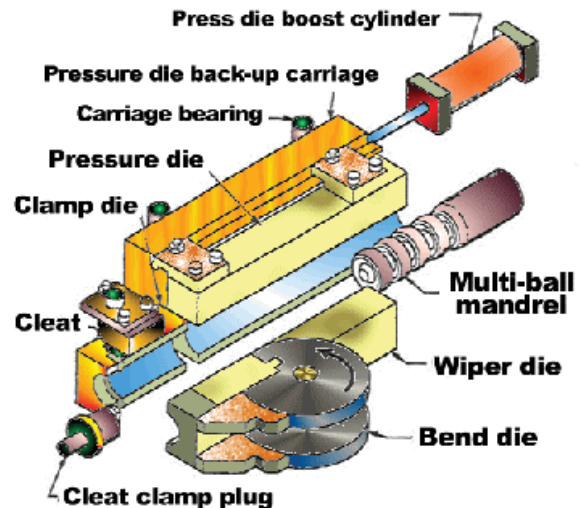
Illustration of a mechanical tube bending system. (Courtesy from Summo Manufacturing)
